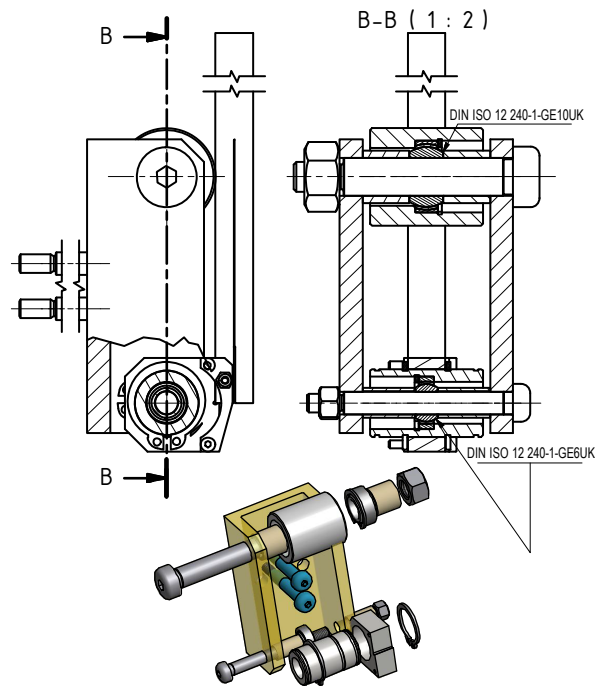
Drawing of the assembled specimen gripping mechanism.
